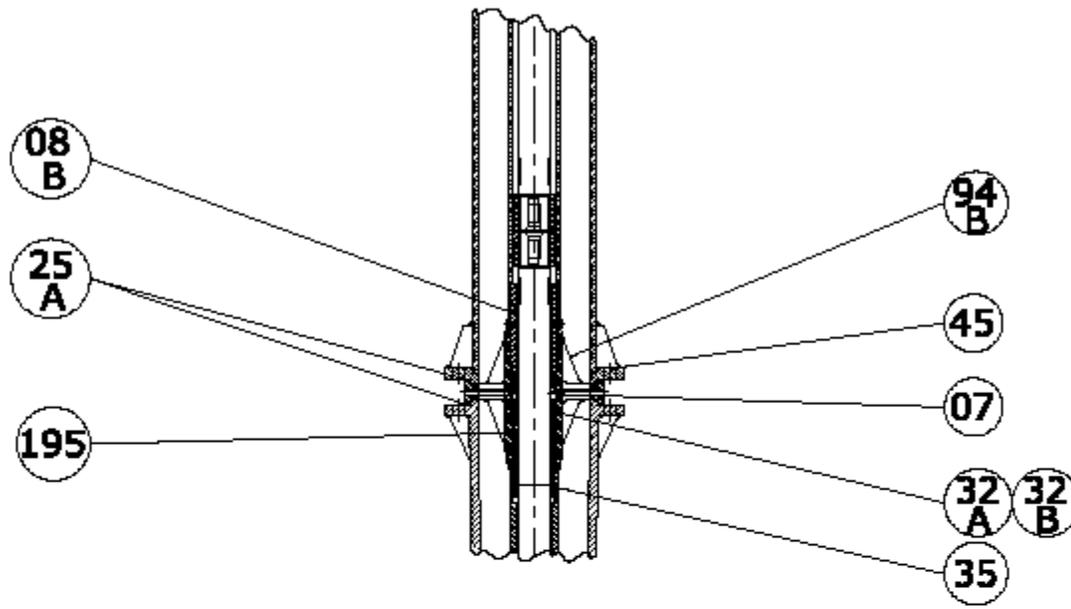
BOWL ASSEMBLY OF ENCLOSED IMPELLER
